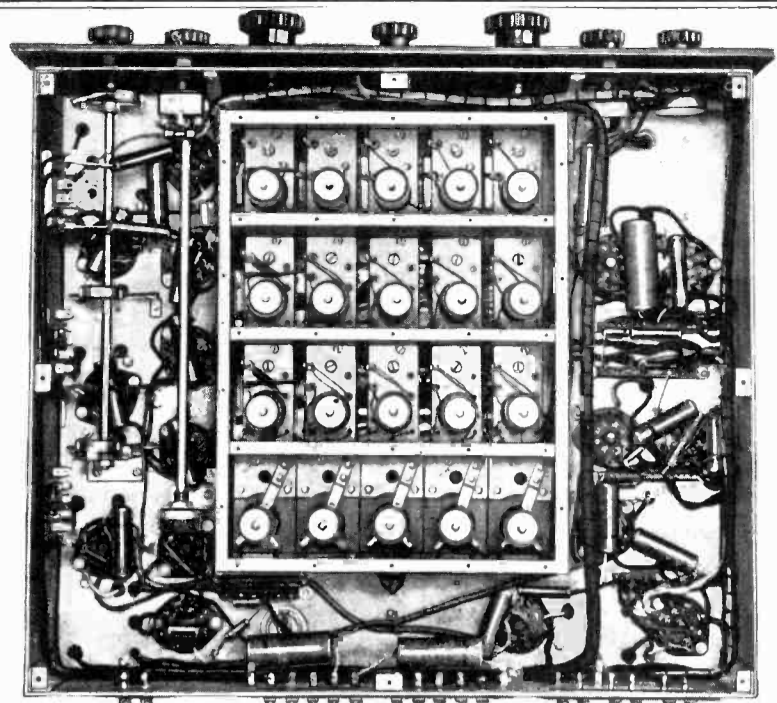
Bottom view of the "SP-200-X" showing the coil assembly and general lay-out of parts.
